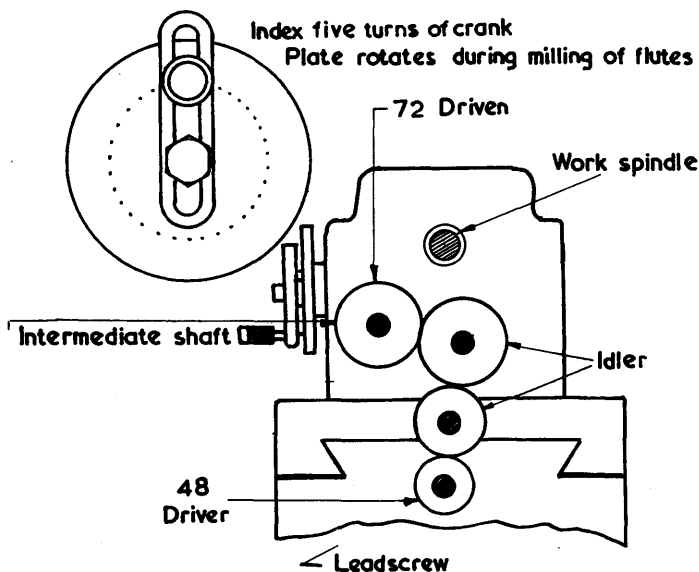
Gearing Arrangements when Spiral Milling.
